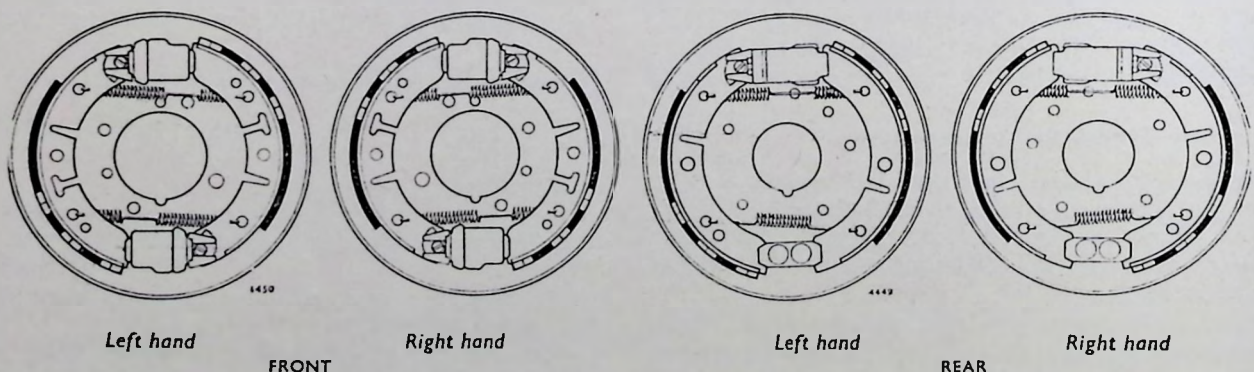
View of brakes with the drums removed, showing correct location of pull off springs.
